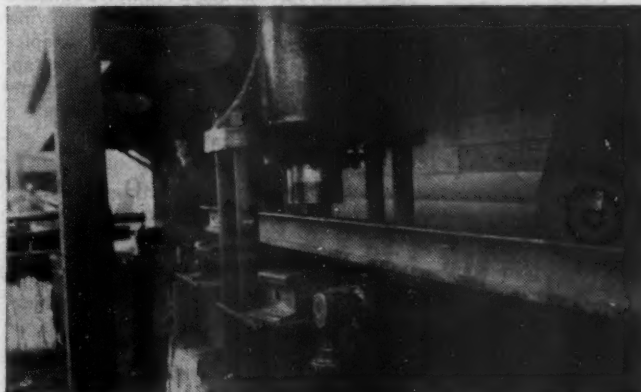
100-ton Hydraulic Press Used in Straightening Reclaimed Rails
